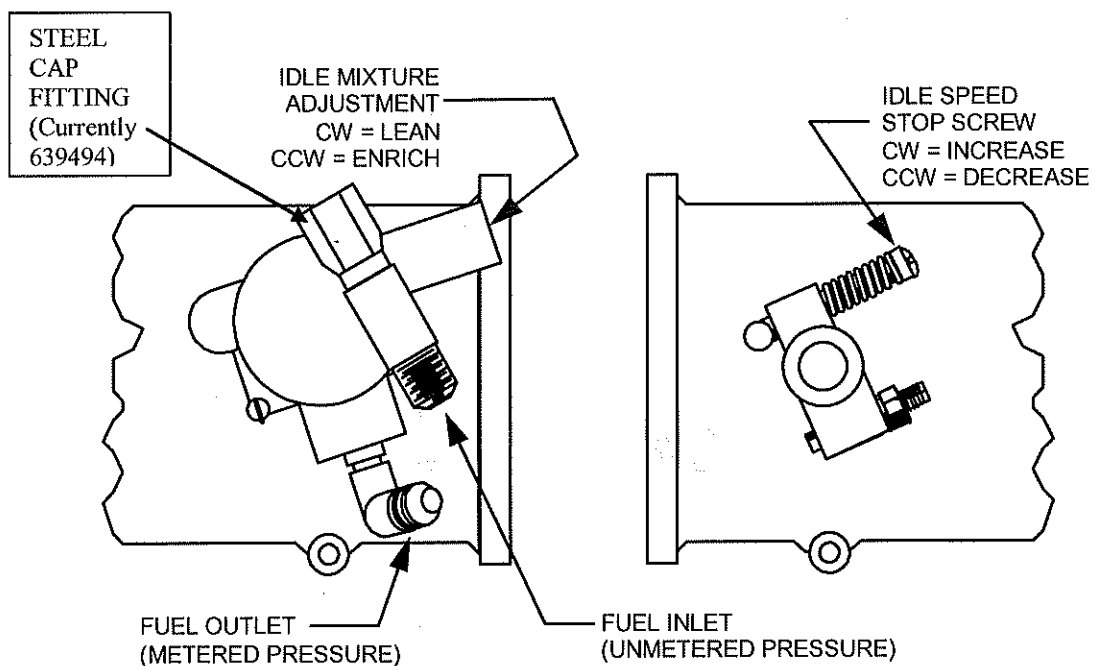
THROTTLE & METERING ASSEMBLY
